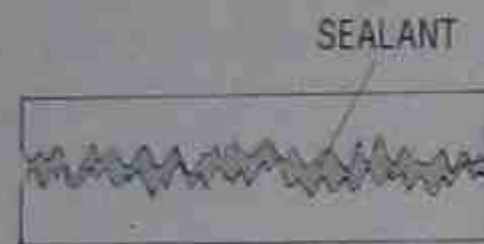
Sealants fill the voids caused by surface asperities.
